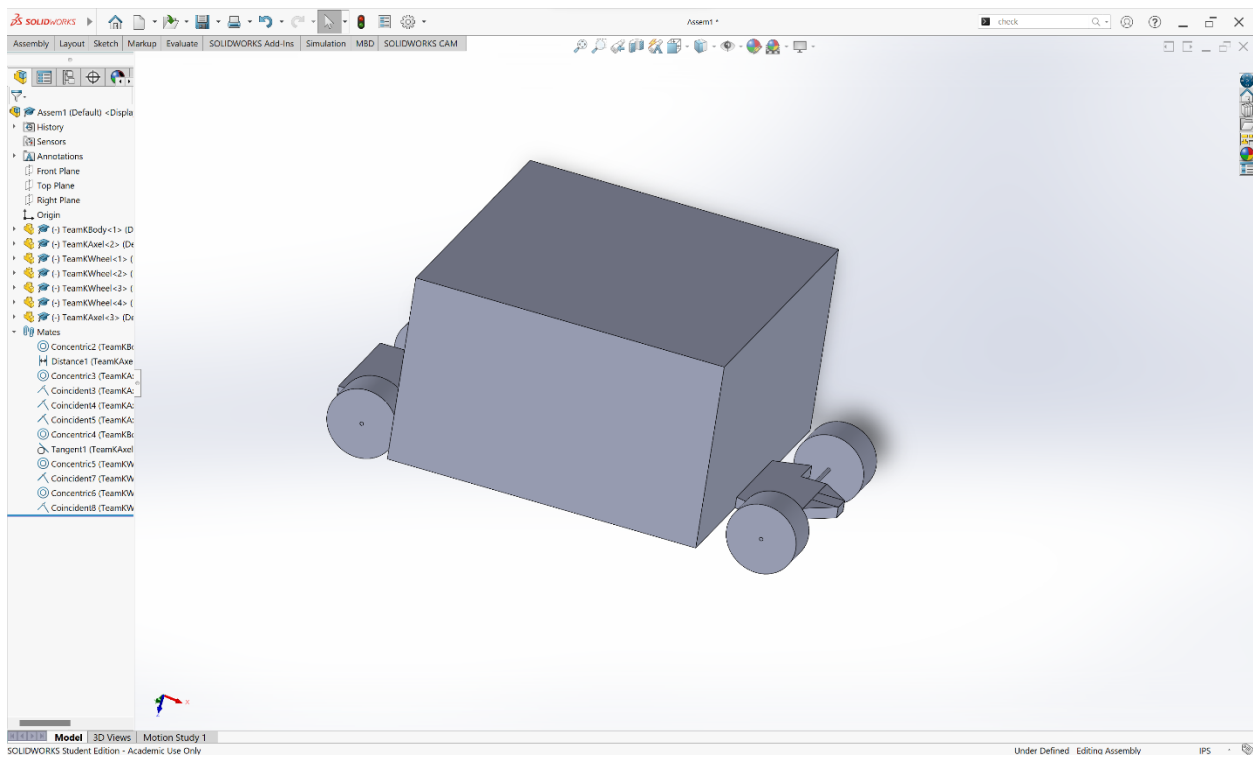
This is a picture showing the wheels we will be using for our car. All four wheels will be the same.
